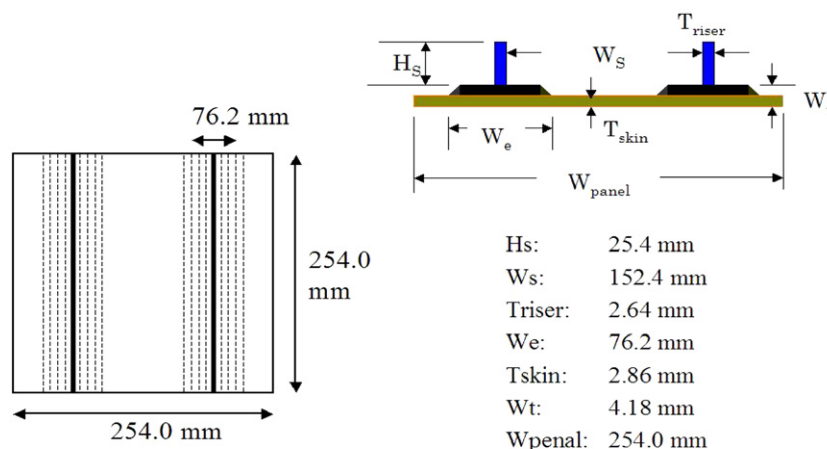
The geometry and dimension of two-blade stitched stiffened panel.
